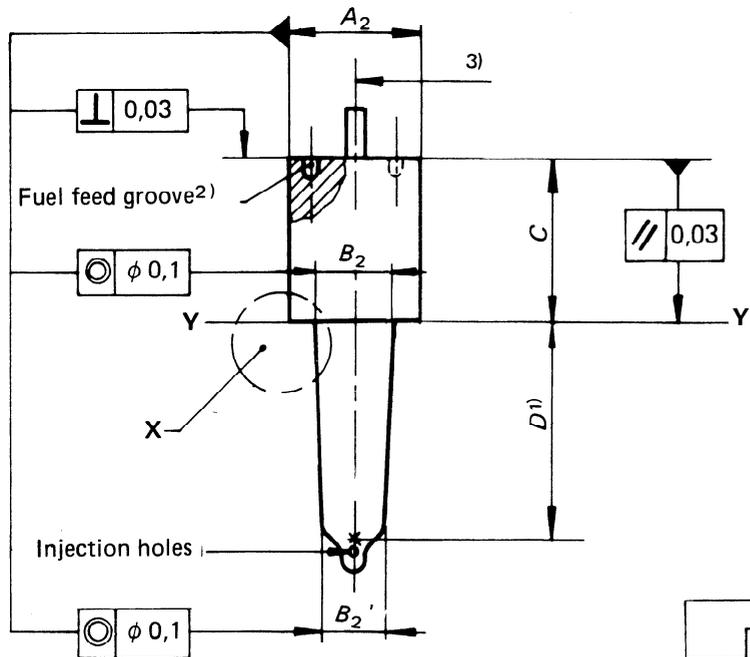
Hole type, long stem nozzle – Type "A1" and "A2"
